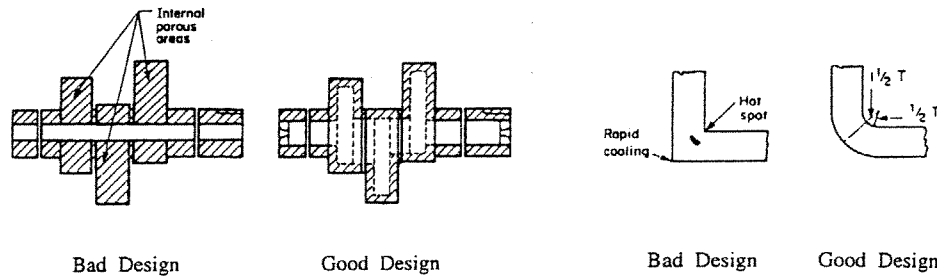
Examples of good designs and bad designs for casting. (A) Using uniform cross sections. (B) Rounding corners to avoid the hot spot. (Source: Bralla, J. G. *Handbook of Product Design for Manufacturing*, McGraw-Hill, New York, 1986.)
